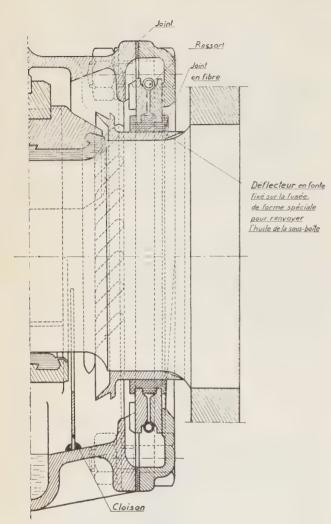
Isothermos* box dust shield (C. F. F. coaches) (taken from C. F. F. drawing 12184).
